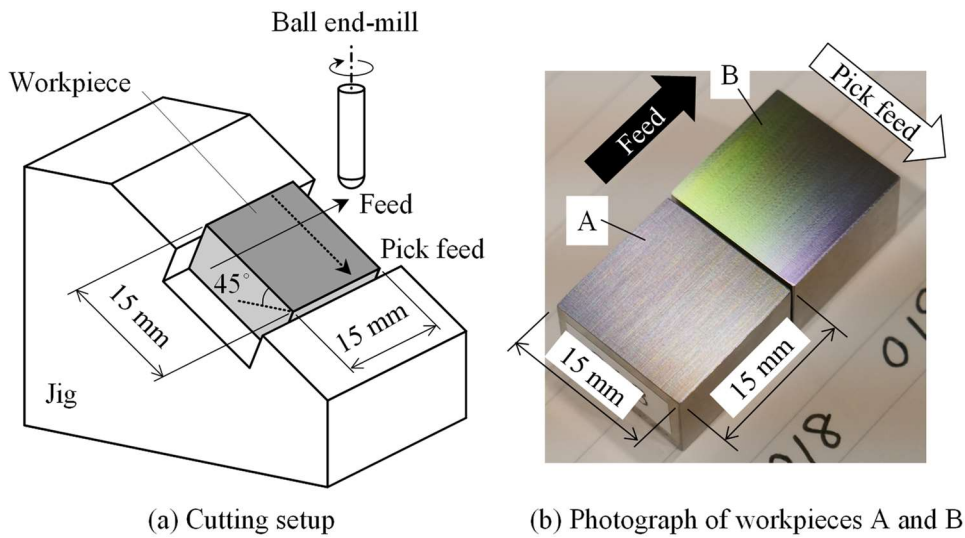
Cutting setup and photograph of workpieces A and B
